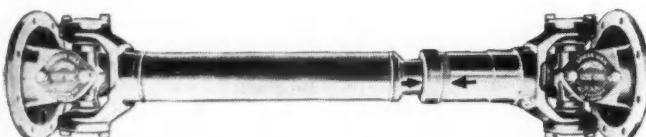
Arrows on the shaft end and on the slip yoke must line up exactly to insure parallel alignment of the joints.
